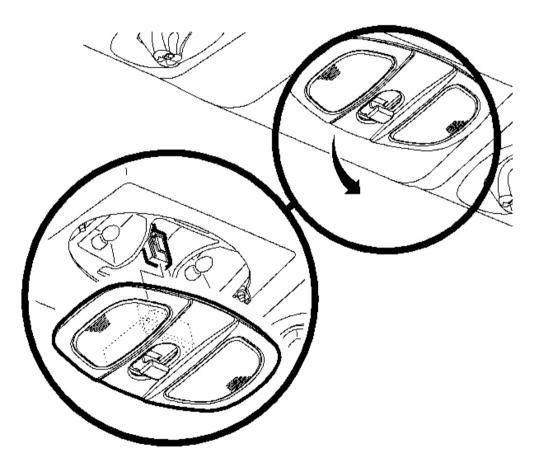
View Of Sunroof Switch Courtesy of GENERAL MOTORS CORP.
